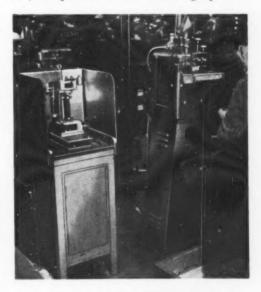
One of the British-built Sleeper & Hartley machines in the spring-making section
